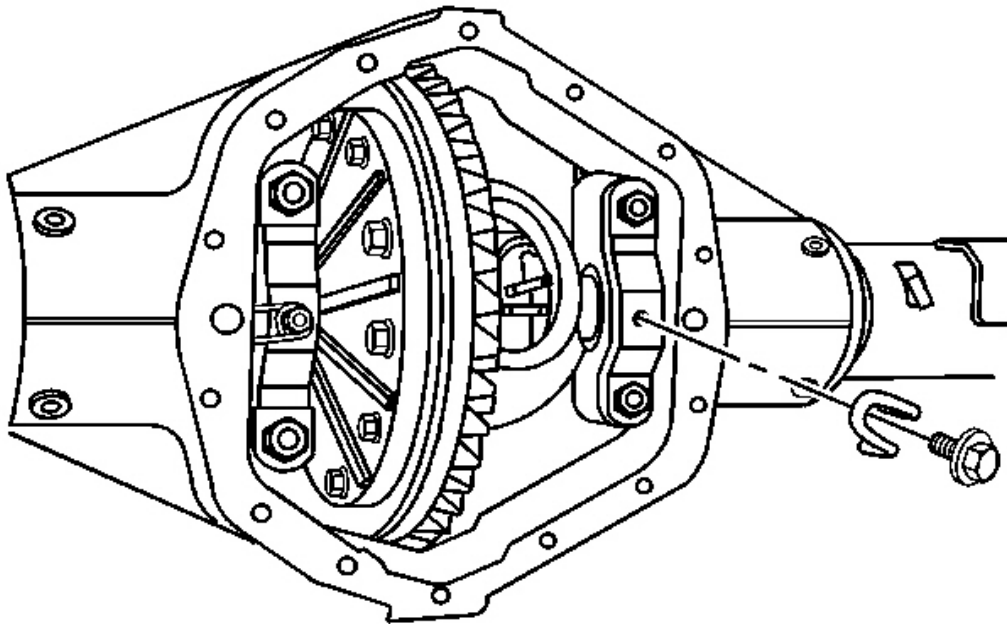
Right Side Differential Bearing Adjuster Nut Lock
